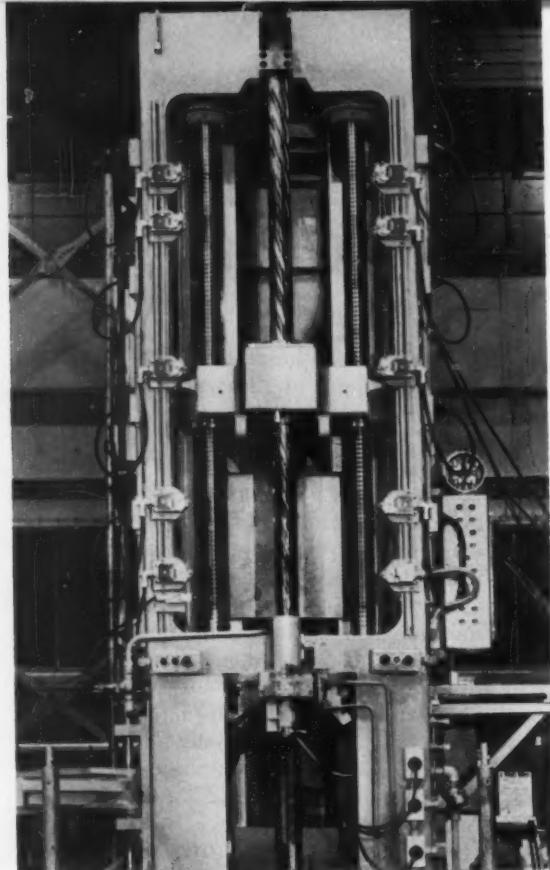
Chatter is eliminated by departing from conventional design of pull-up broaching machine. Here, a pair of matched ball-screws provide a direct, in-line pull to the cutting tool.
